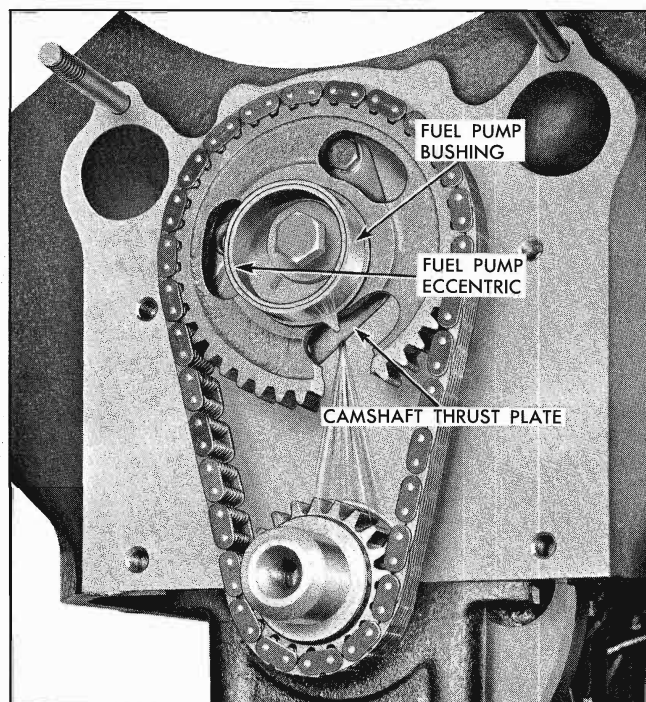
A-8 Timing Chain, Sprocket, Camshaft Thrust Plate, Fuel Pump Eccentric and Rocker Arm Lubrication
